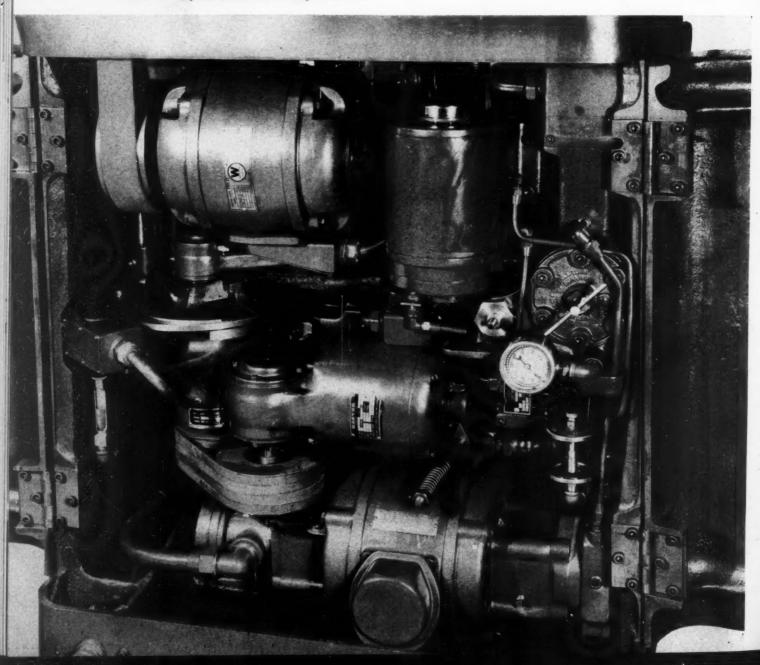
Rear of machine with covers open shows compact arrangement of wheel drive, oscillating drive and pump drive. All adjustments can readily be made
